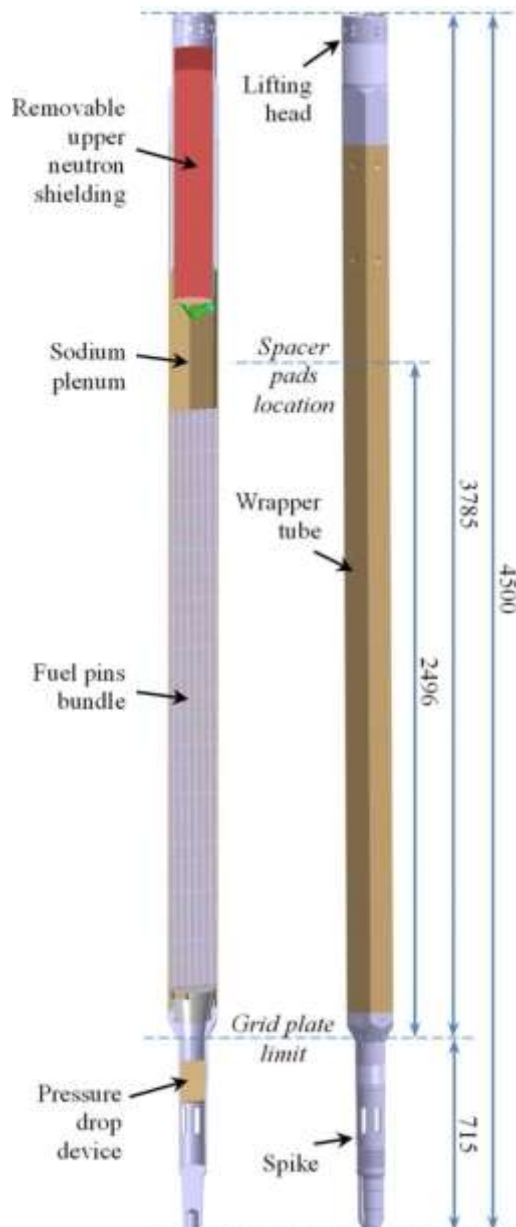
Cross section of an ASTRID CRF v4 fuel assembly (dimensions in mm) [5]
